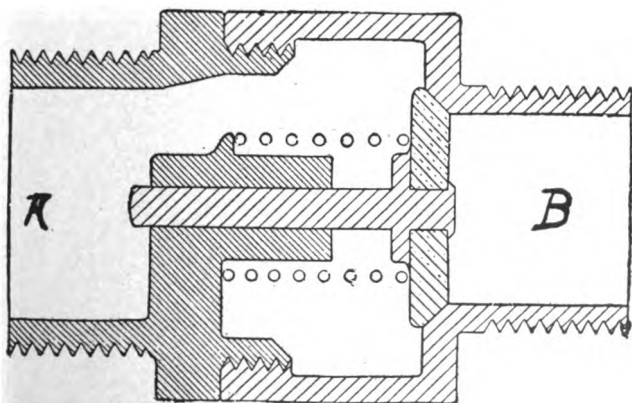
a.— Check Valve for Use with Carbureter and Two-Cycle Engine.
